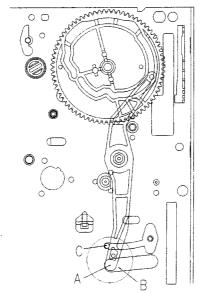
ASSEMBLY OF THE CAM GEAR & RELAY LEVER
